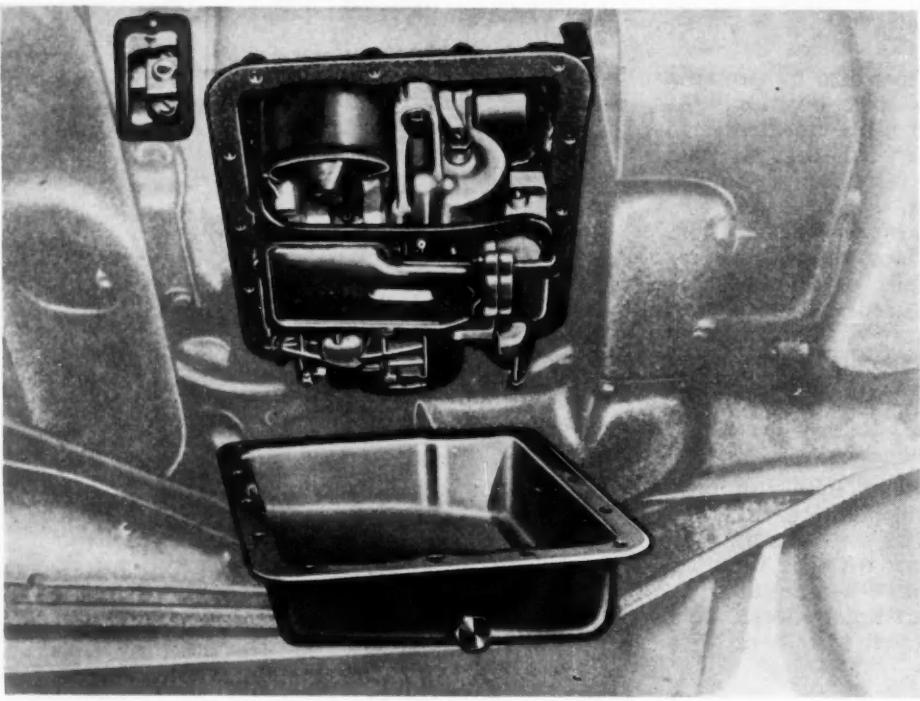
Removing the transmission oil pan exposes all control elements for easy removal
